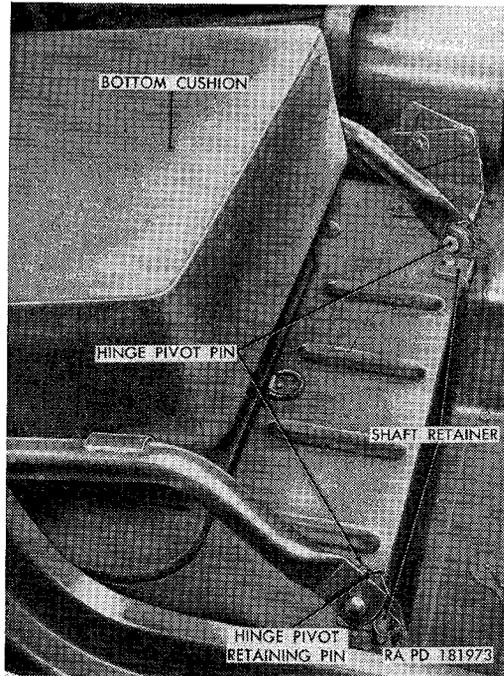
Passenger seat assembly (M38A1)—installed.
